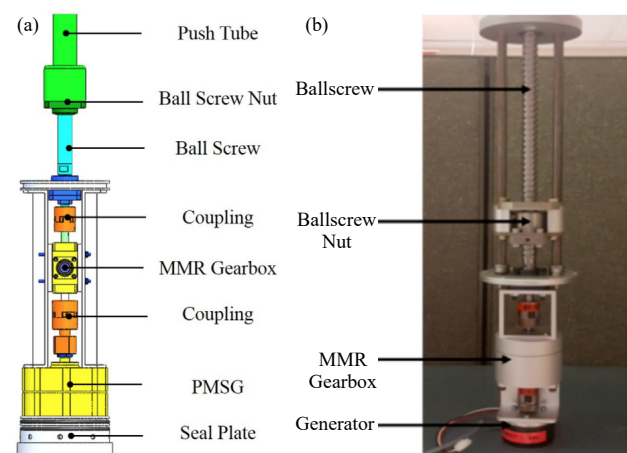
A ball screw mechanism is shown as an example to illustrate the working principle of the mechanical power take-off mechanism, with a schematic plot (a) and a mechanical motion rectifier (b), adapted from [174,186].
